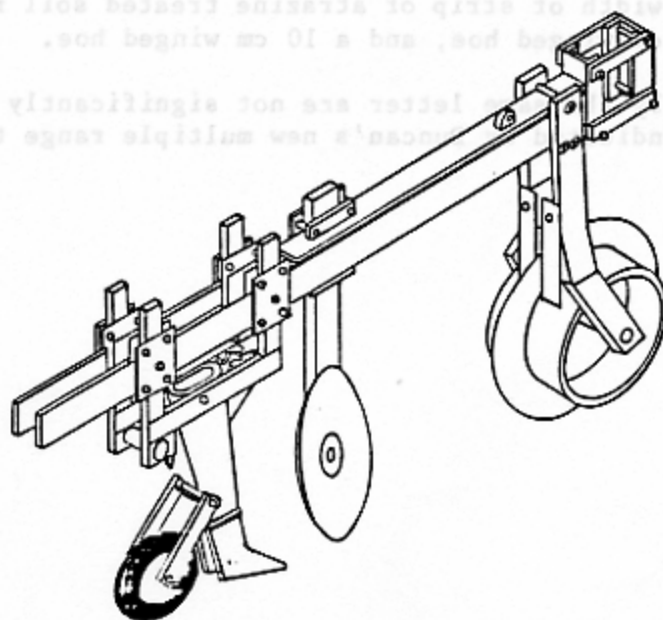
Single drill unit with coulters gauge wheel, 46 cm diameter concave disc to remove atrazine treated soil, spear point hoe opener, and 2.5 x 25.0 cm press wheel.
